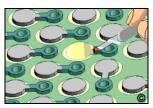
Remove the defective BGA pad and soldermask from the connecting circuit.
